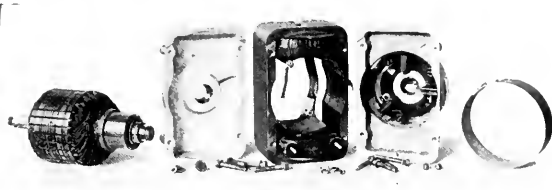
DETAIL VIEW OF MOTOR GENERATOR
